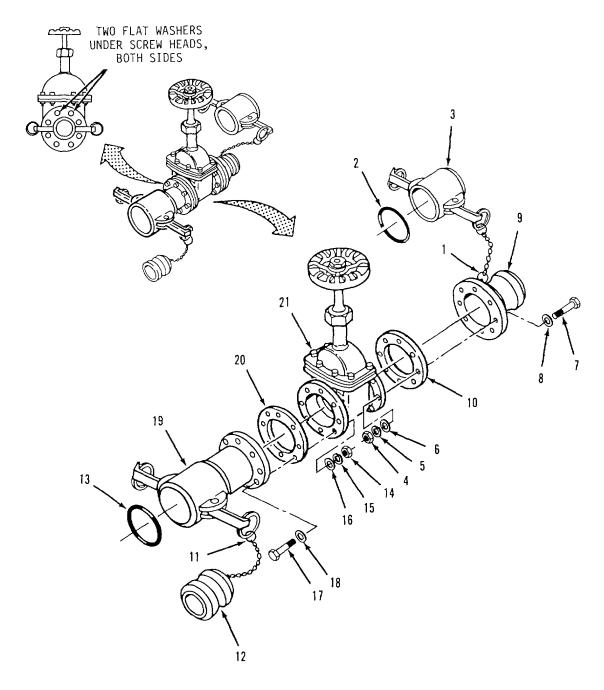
Gate Valve Assembly (4-Inch) Disassembly.
